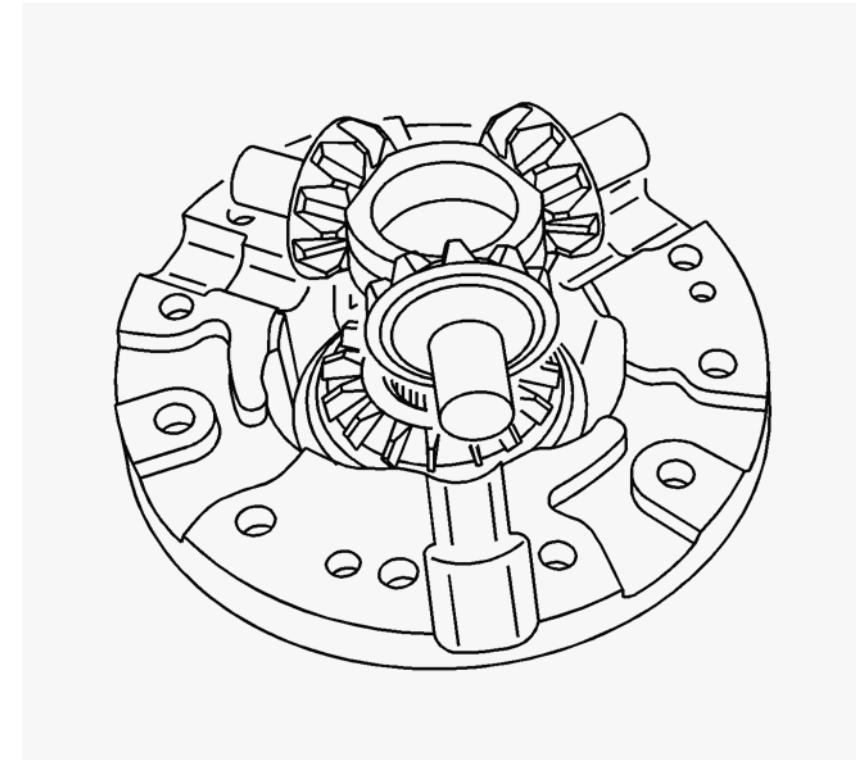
Locking Differential Spider, Differential Pinion Gears & Thrust Washers
